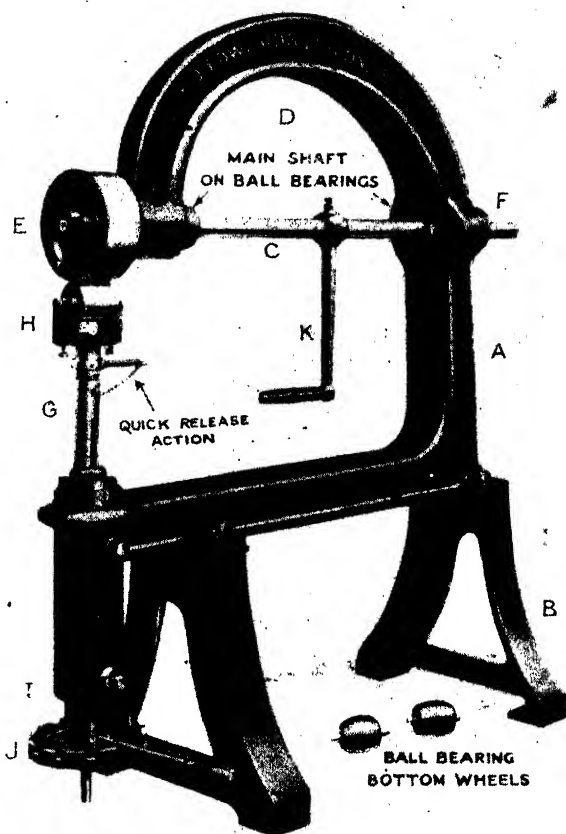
STANDARD TYPE OF WHEELING MACHINE
